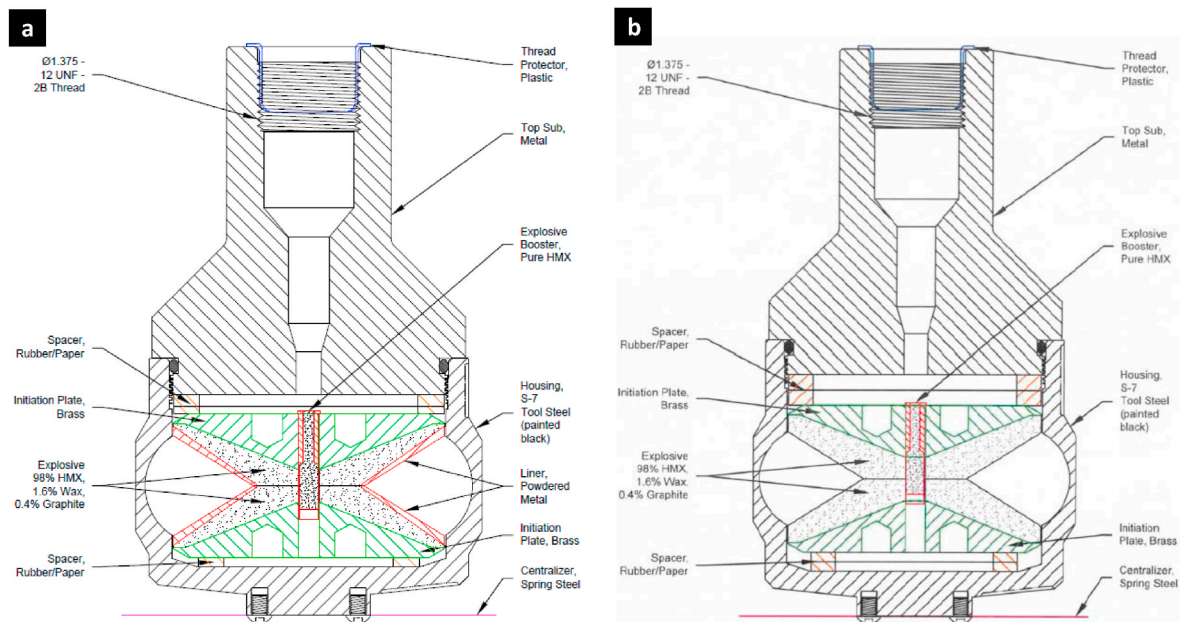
Schematic cross-sections through a) conventional shaped charge pipe cutter design (with liners) and b) the new Energetic Expander tool (no liners), designed to locally enlarge the casing pipe diameter without inducing casing fracture (Figure courtesy of W.T. Bell International, Inc.).
